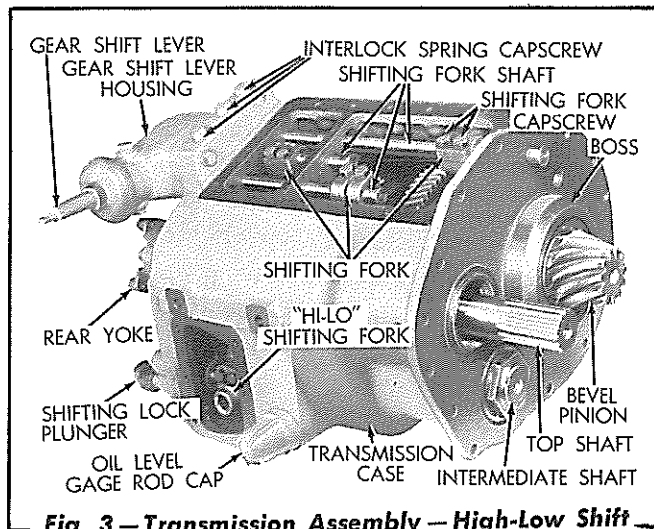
Transmission Assembly — High-Low Shift Lever Housing and Side Cover Removed
